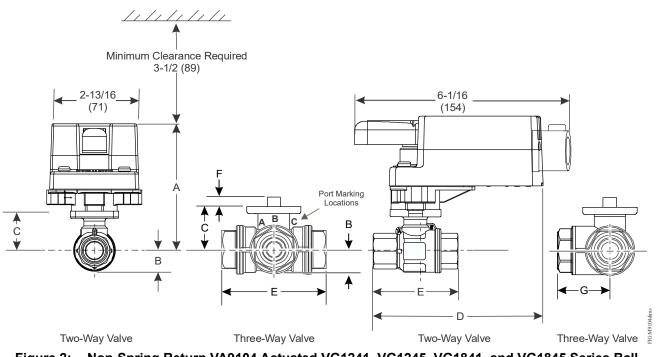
Non-Spring Return VA9104 Actuated VG1241, VG1245, VG1841, and VG1845 Series Ball Valve with optional M9000-551 Linkage dimensions, in. (mm.)
